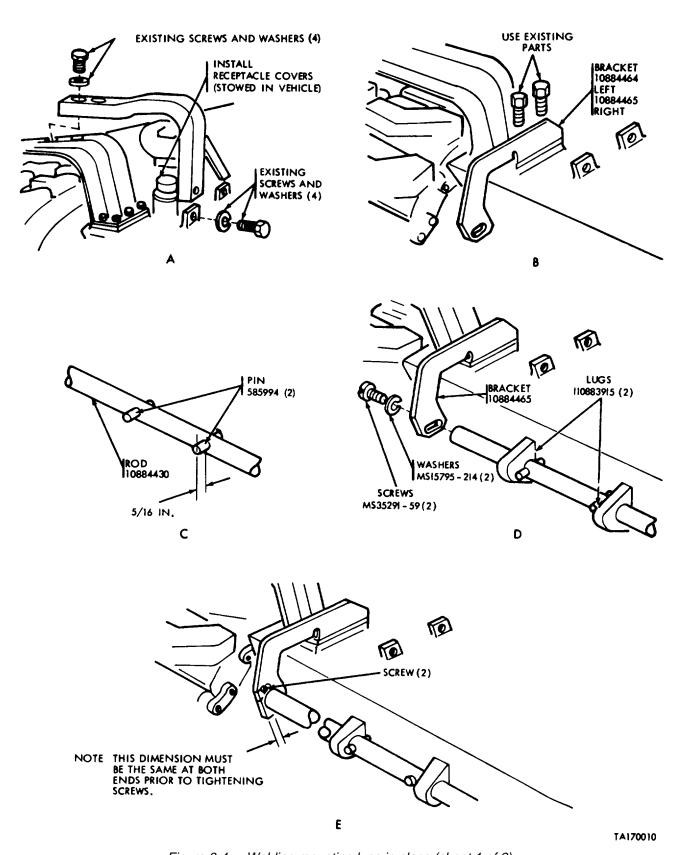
Welding mounting lugs in place (sheet 1 of 2).
